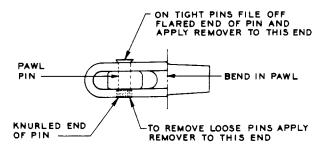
Rotary Pawl with Headless-Type Pawl Pin Having Knurl Flush
